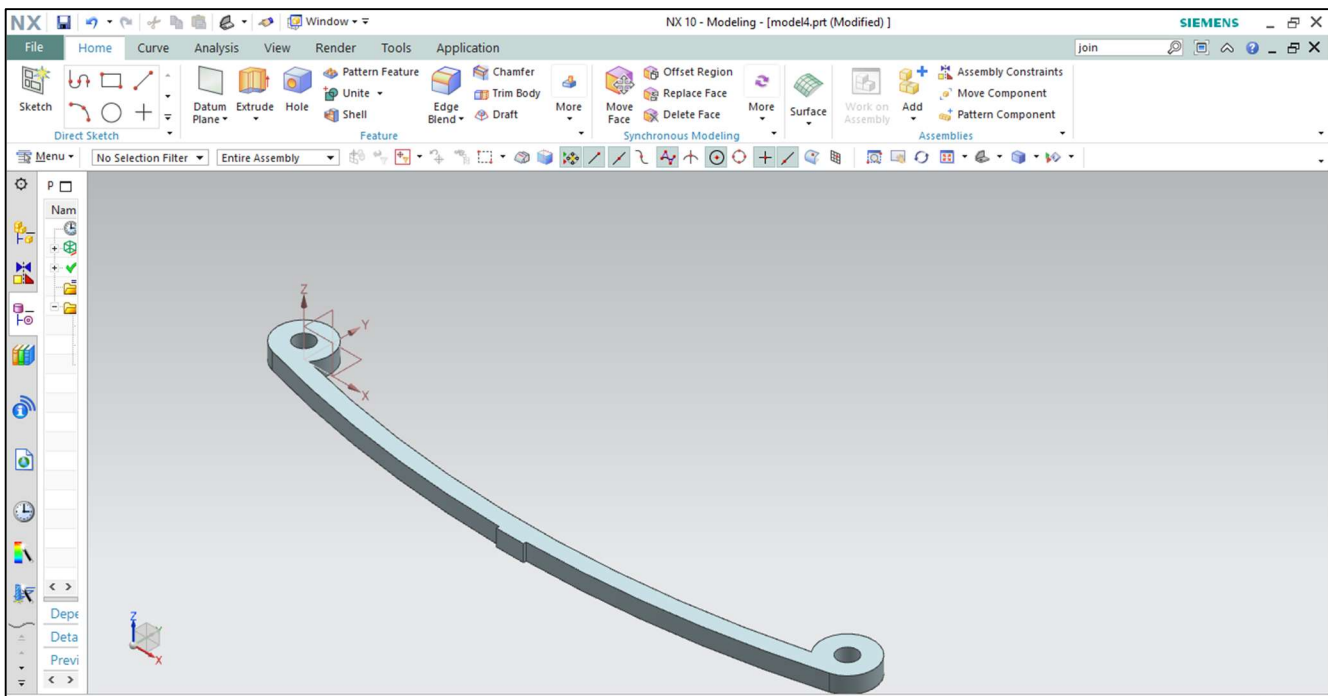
3D Modeled Newly Desinged Leaf Spring (Isometric View)
